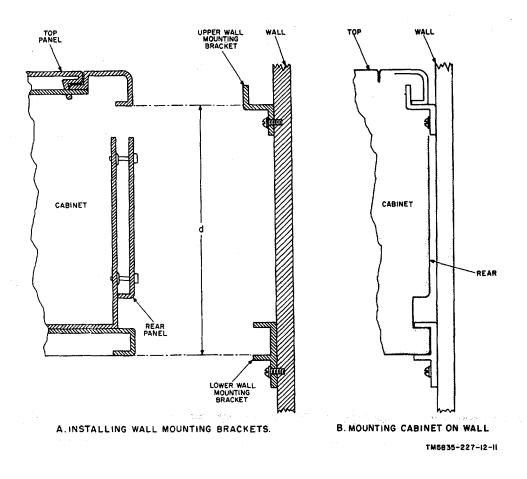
Recorder-Reproducer Set, Sound AN/GSH-17 wall installation.
